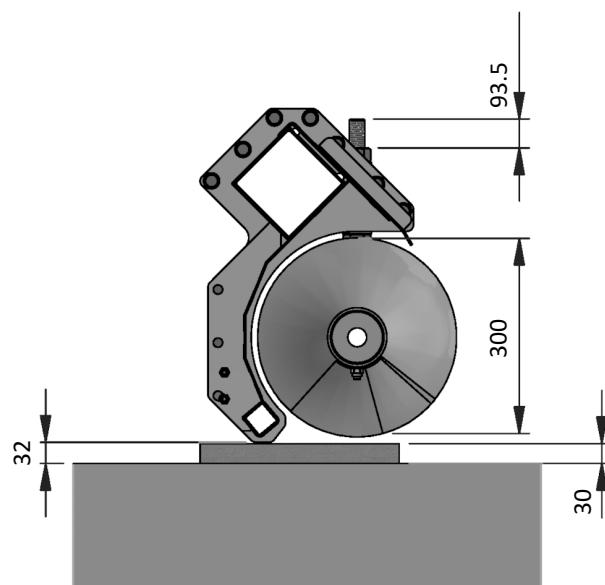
Completed Intermediate Joint Assembly – Dimensions and Clearances
